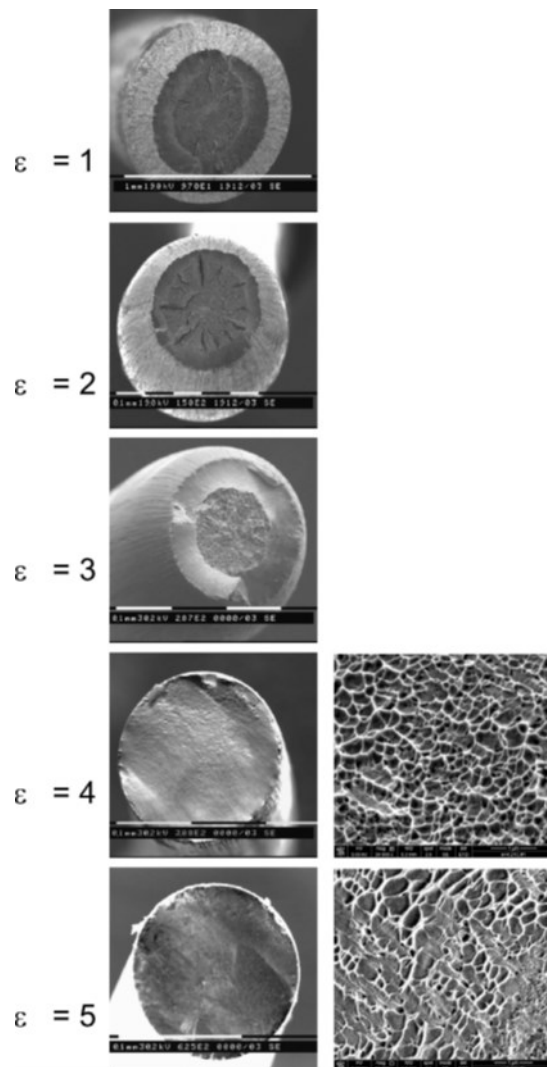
SEM micrographs of the fracture surfaces of the wires drawn to fracture after cold-drawing to $\varepsilon = 1\sim 5$. [122]
